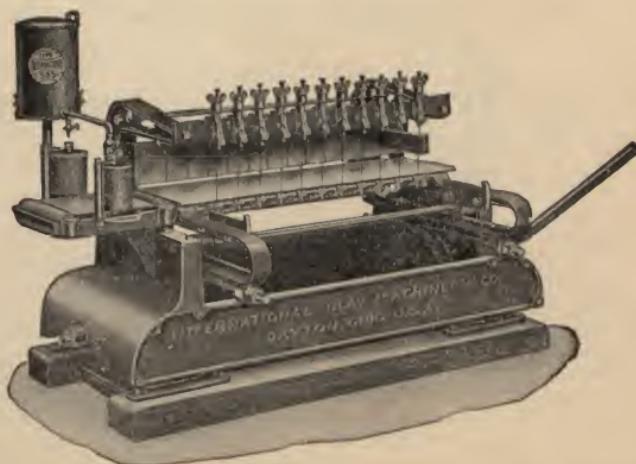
,09.—International wire cutter or board delivery cutting table. *It operates* by hand; cutting into brick the bar of clay formed by the stiff mud pug mill.
